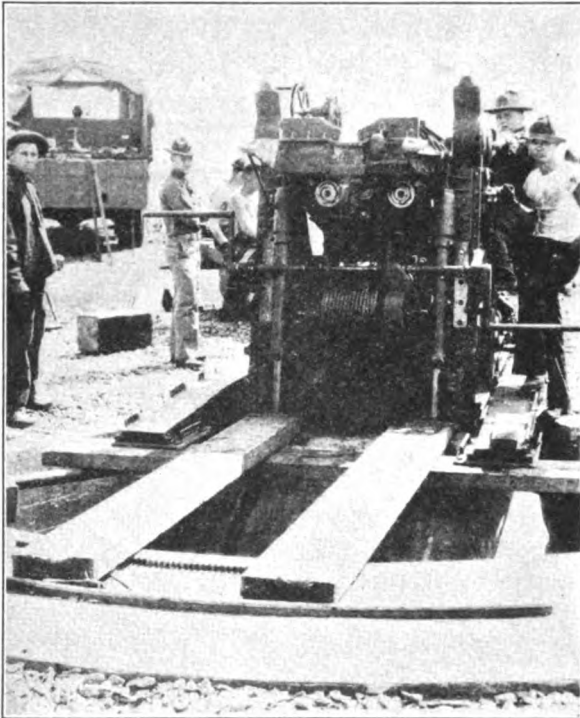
Front axle and wheels removed from cradle, cradle moved forward, trunnions about to be lowered into trunnion bearings. Outer ends of jack foot planks against raised lip of roller path and chamfered ends under jacks
